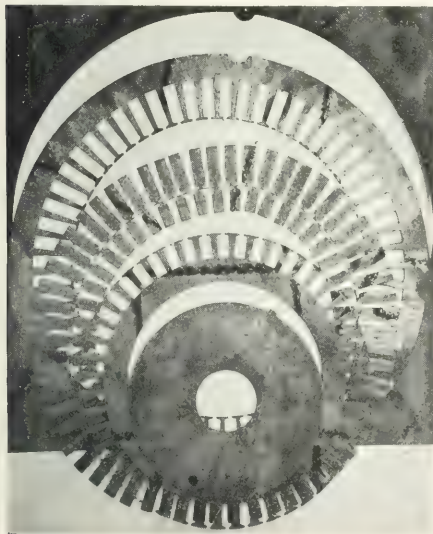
PUNCHINGS FOR INDUCTION MOTOR CORES
